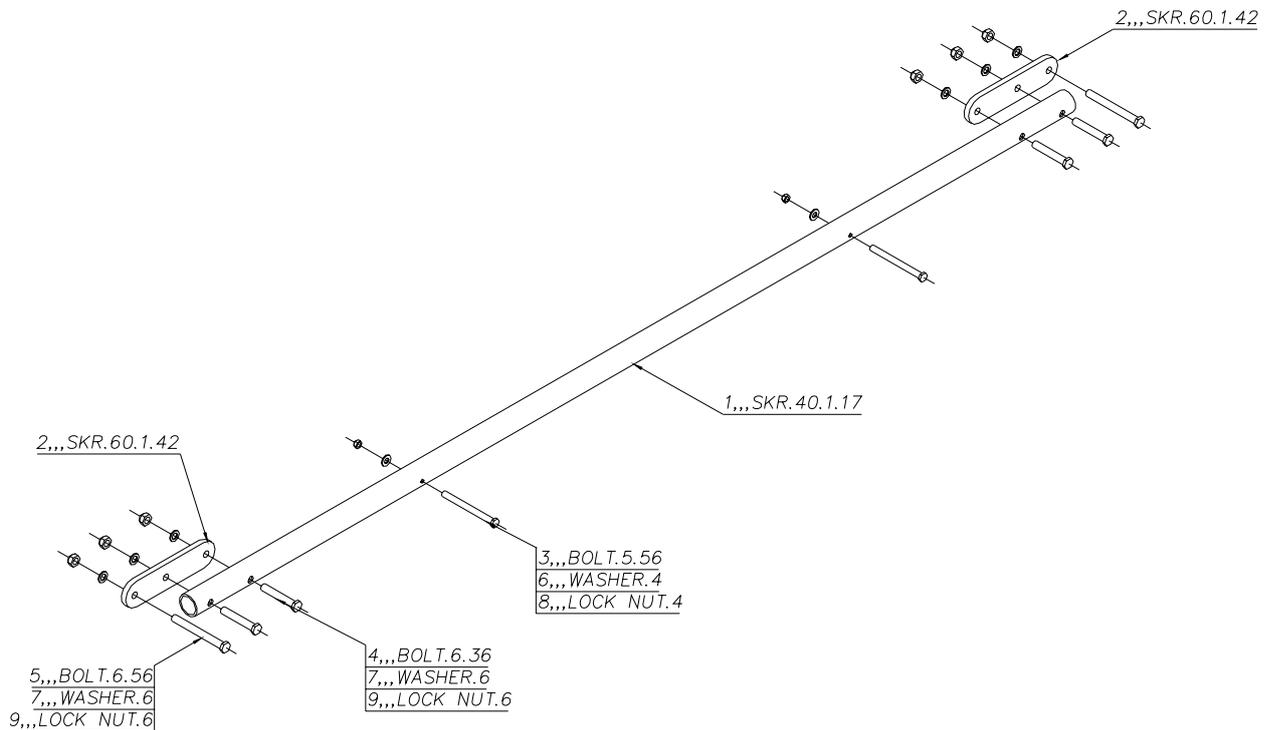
; tu40, rear cabin frame cross-piece, looking from the front.
